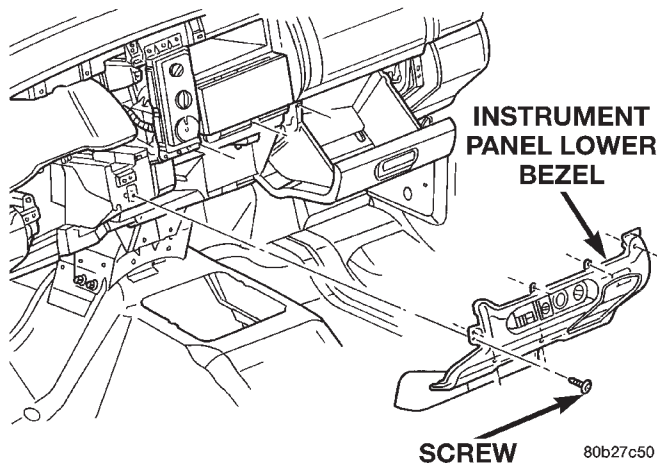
Instrument Panel Lower Bezel Remove/Install
